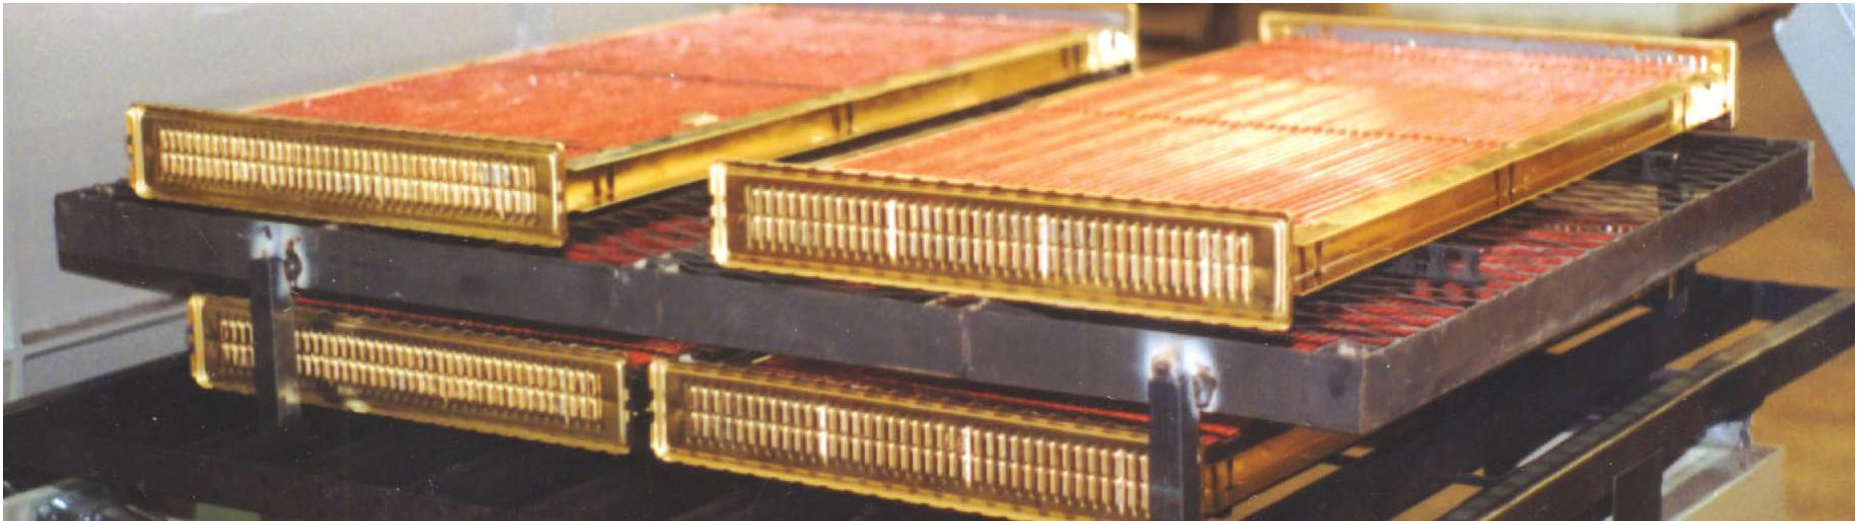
CUB brazed copper/brass heat exchanger assemblies. Courtesy of SECO/WARWICK Corp.
